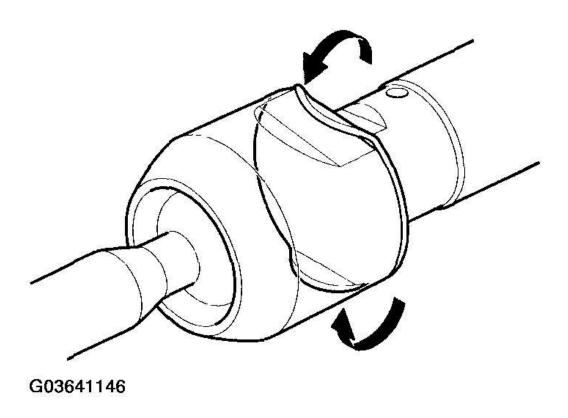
Bending Lock Washer Courtesy of AMERICAN HONDA MOTOR CO., INC.
